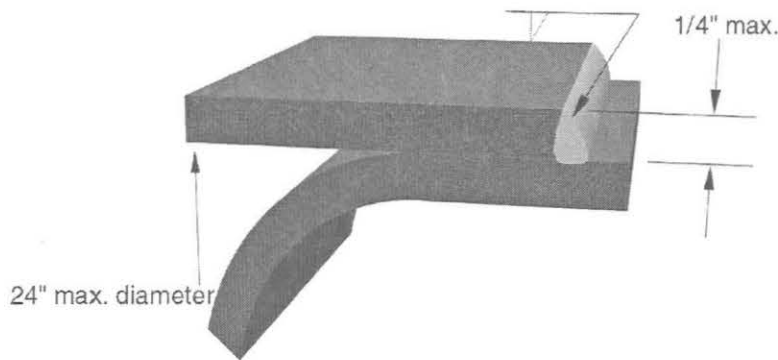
Alternative shell-to-head Type 6 weld joint.
